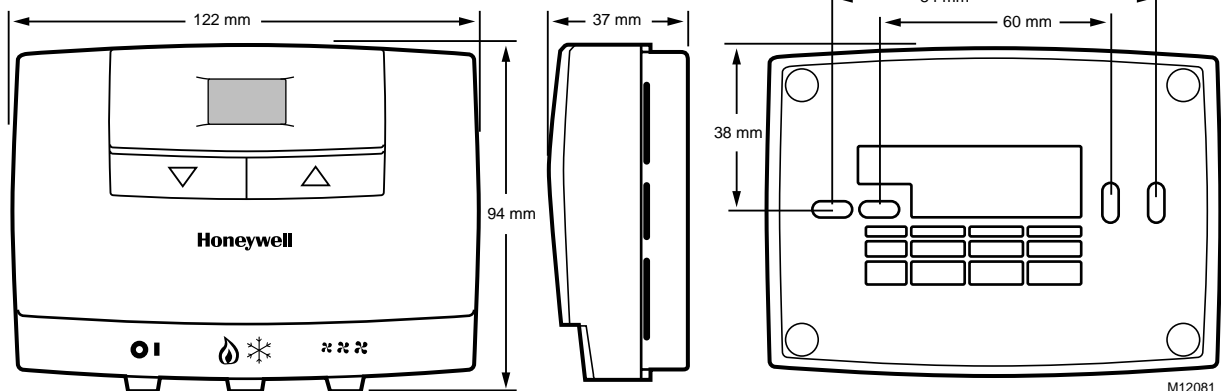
T6572, T6573, T6992, and T6993 dimensions (in mm).
